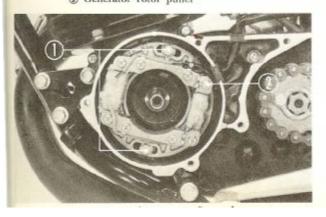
① Generator rotor ② Generator rotor puller
